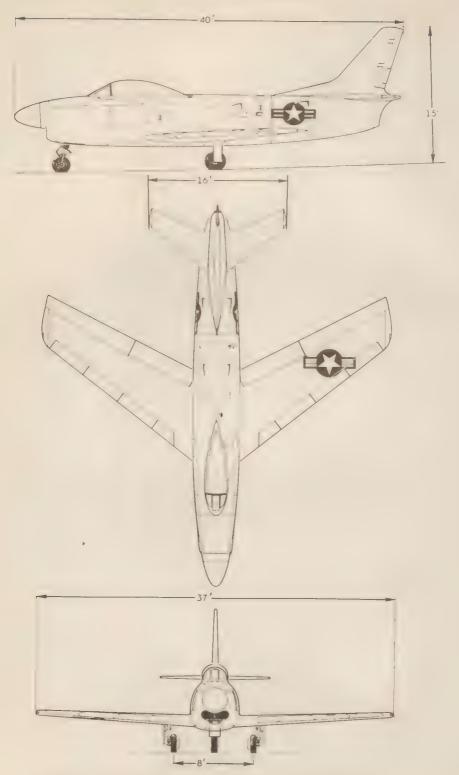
A three-view drawing of the North American F-86 Sabre.
